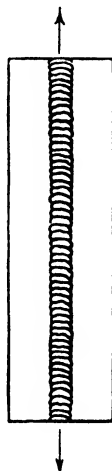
Longitudinal tensile test of welded specimen
